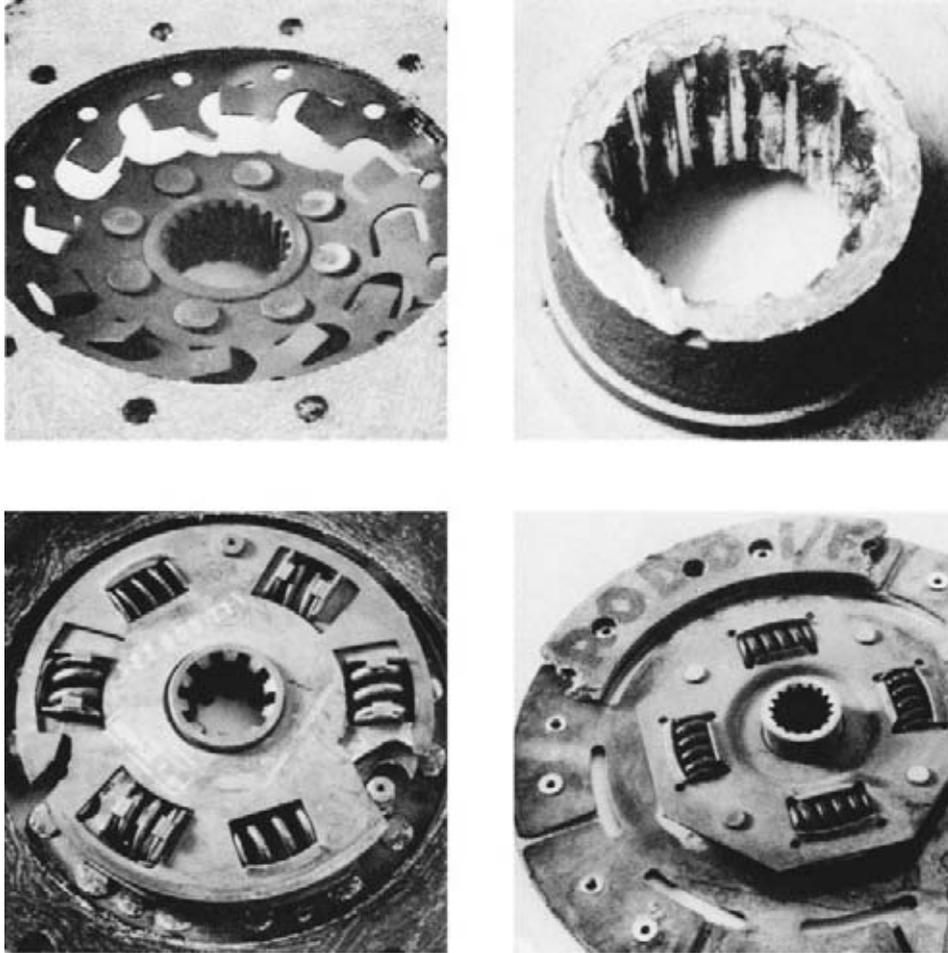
Clutch disc failure comes in many forms; a good technician will determine and correct the cause of abnormal failures so they won't occur again. (Courtesy of LUK Clutches)
